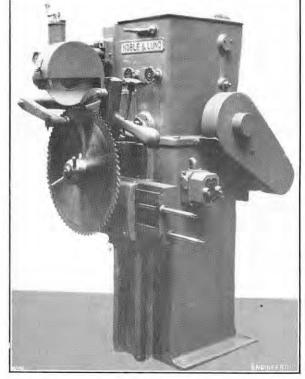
Rotary-Table Continuous Grinding Machine; Lumsden Machine Co., Ltd. Fig. 20. Automatic Sharpening Machine for Circular Saws; Noble and Lund, Ltd.
